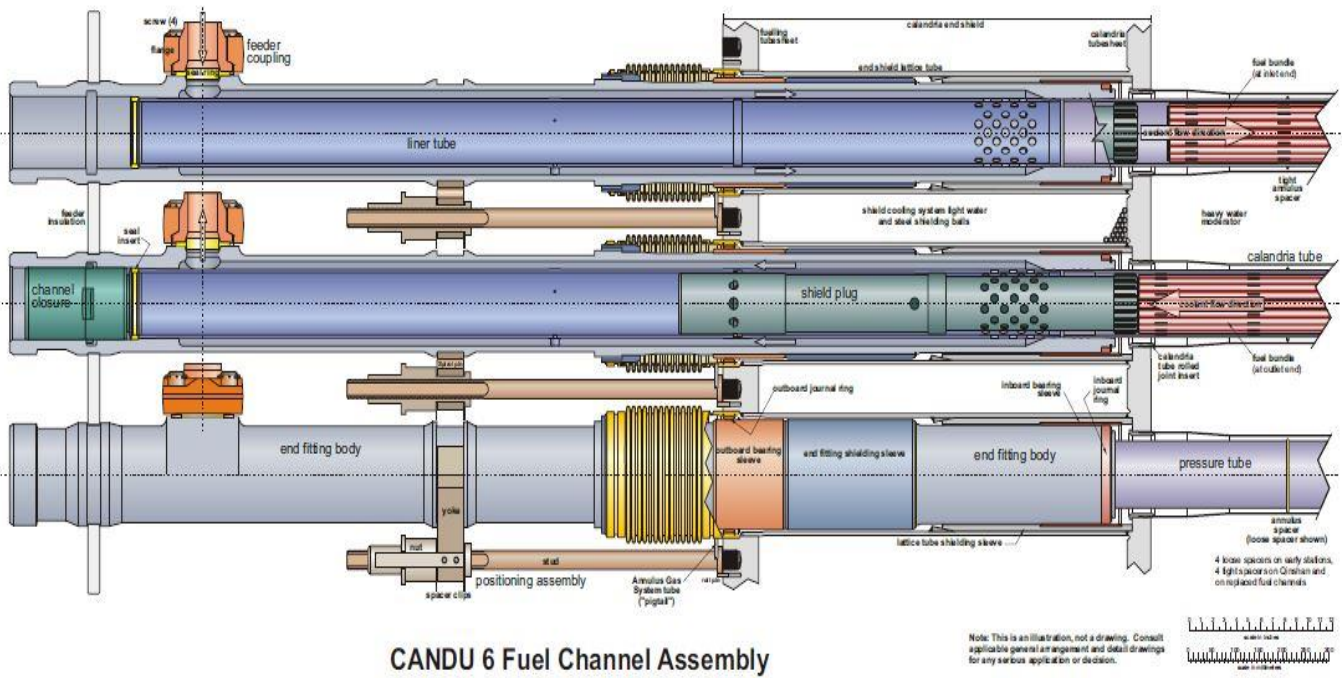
CANDU 6 Fuel Channel Assembly
